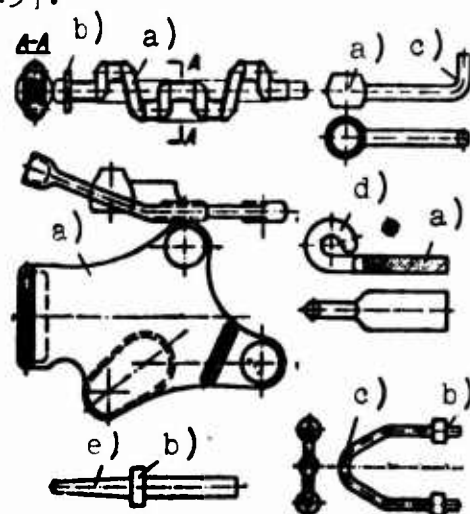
Examples of forgings, stamped by sections by different methods: a) stamping in open dies; b) upsetting on a horizontal-forging machine; c) bending on a bulldozer; d) bending on a horizontal-forging machine; e) rolling.
